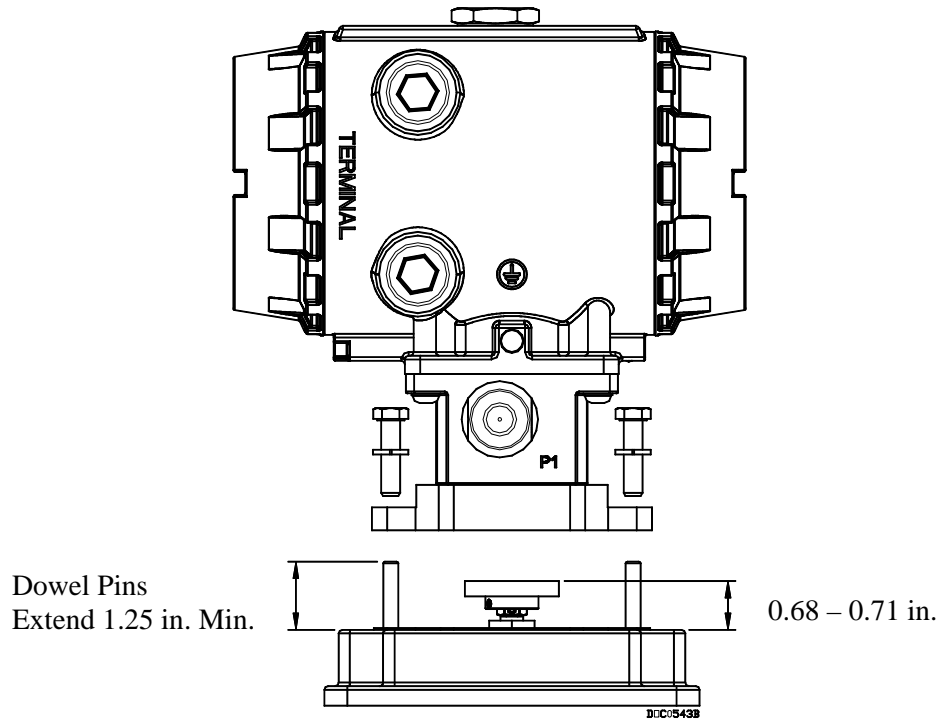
Shaft Adaptor, Magnet and Dowel Pins Installed
